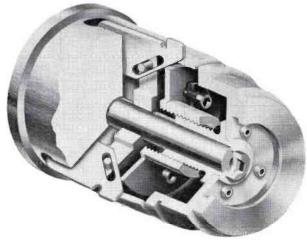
Cut-away view of the reel hub assembly. Unique design of this assembly assures that reels are held very securely to the motor shafts, yet allows easy removal and replacement of tape reels.
